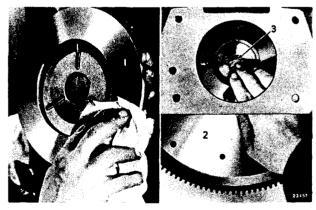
Cleaning Clutch Friction Surfaces and Lubricating the Pilot Bushing
